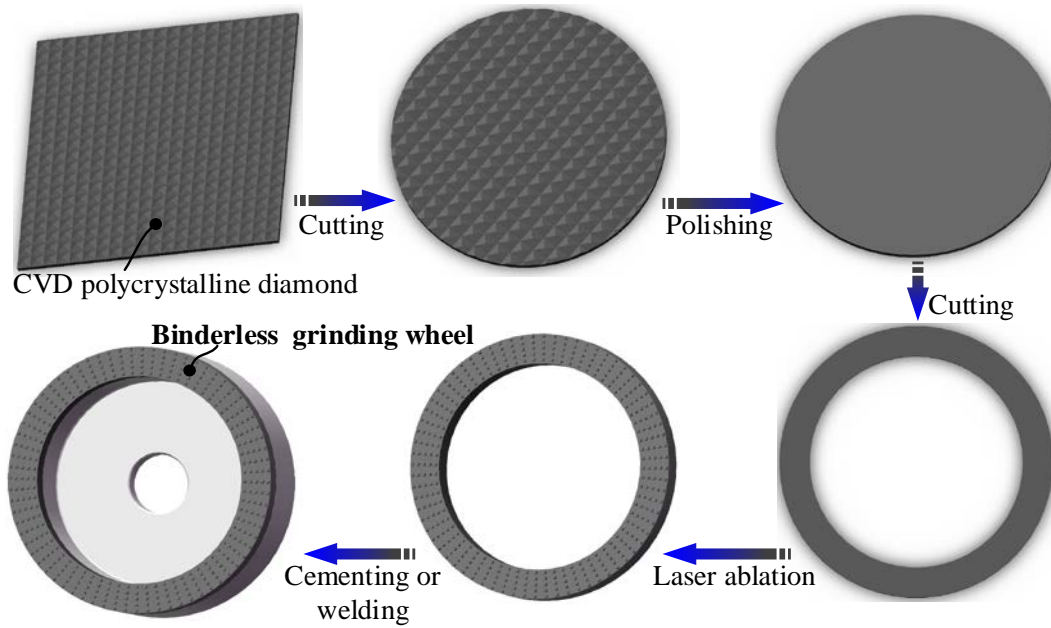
Manufacturing processes of binderless diamond grinding wheel
